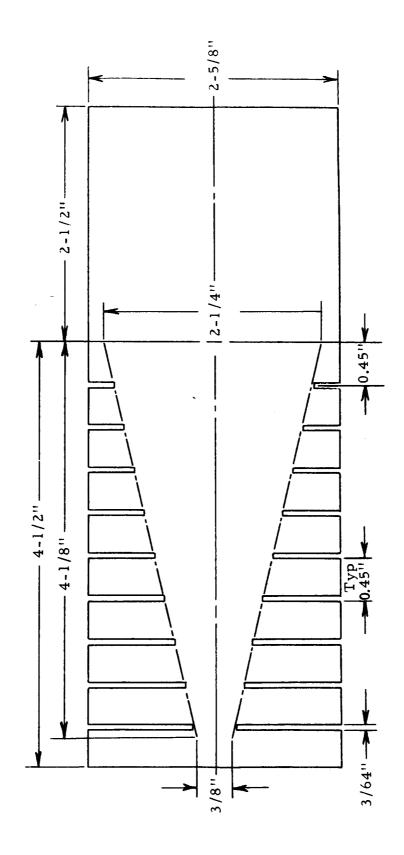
MODIFIED HOULDCROFT CRACK SUSCEPTIBILITY TEST SPECIMEN (REF. 11)
